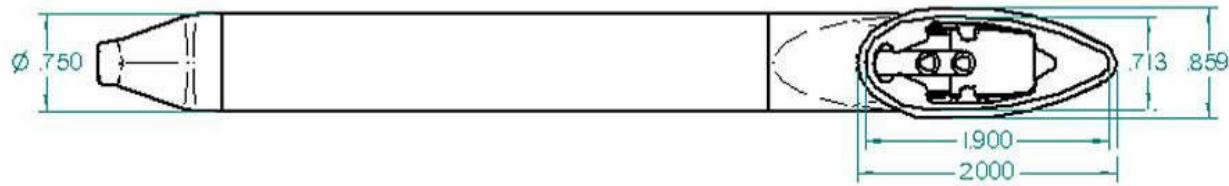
Standard Mount AOA/Pitot Probe Dimensions (Top View)
